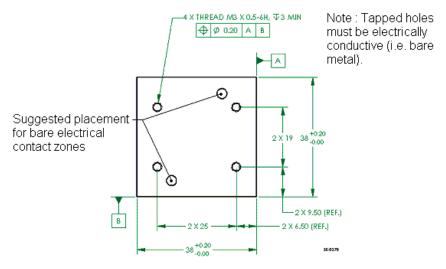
Tapped hole positions for UP12E, without PCB
